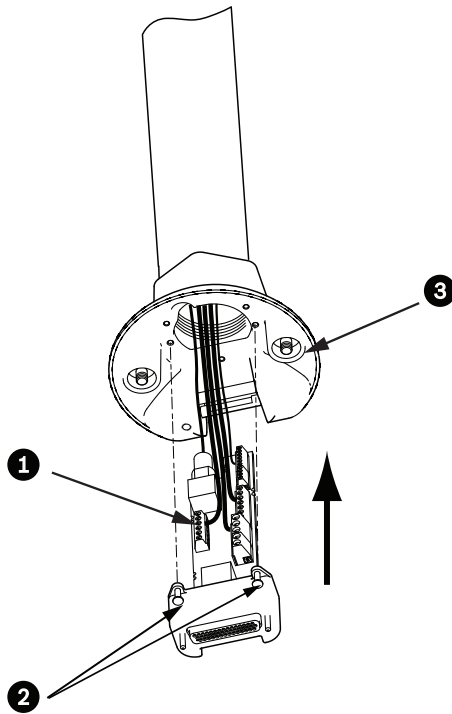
Pipe Interface Board to Dome Cap Assembly
